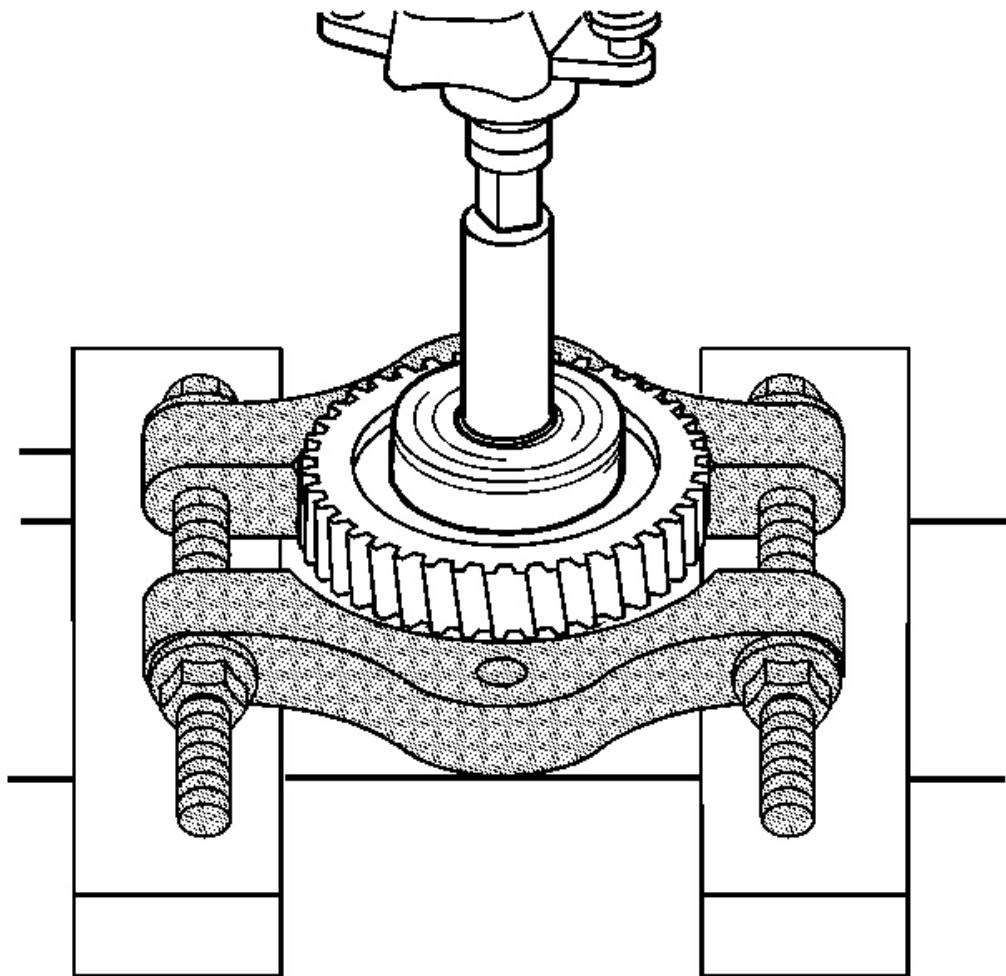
Removing Counter Gear Front Bearing & Reverse Synchronizer Assembly
